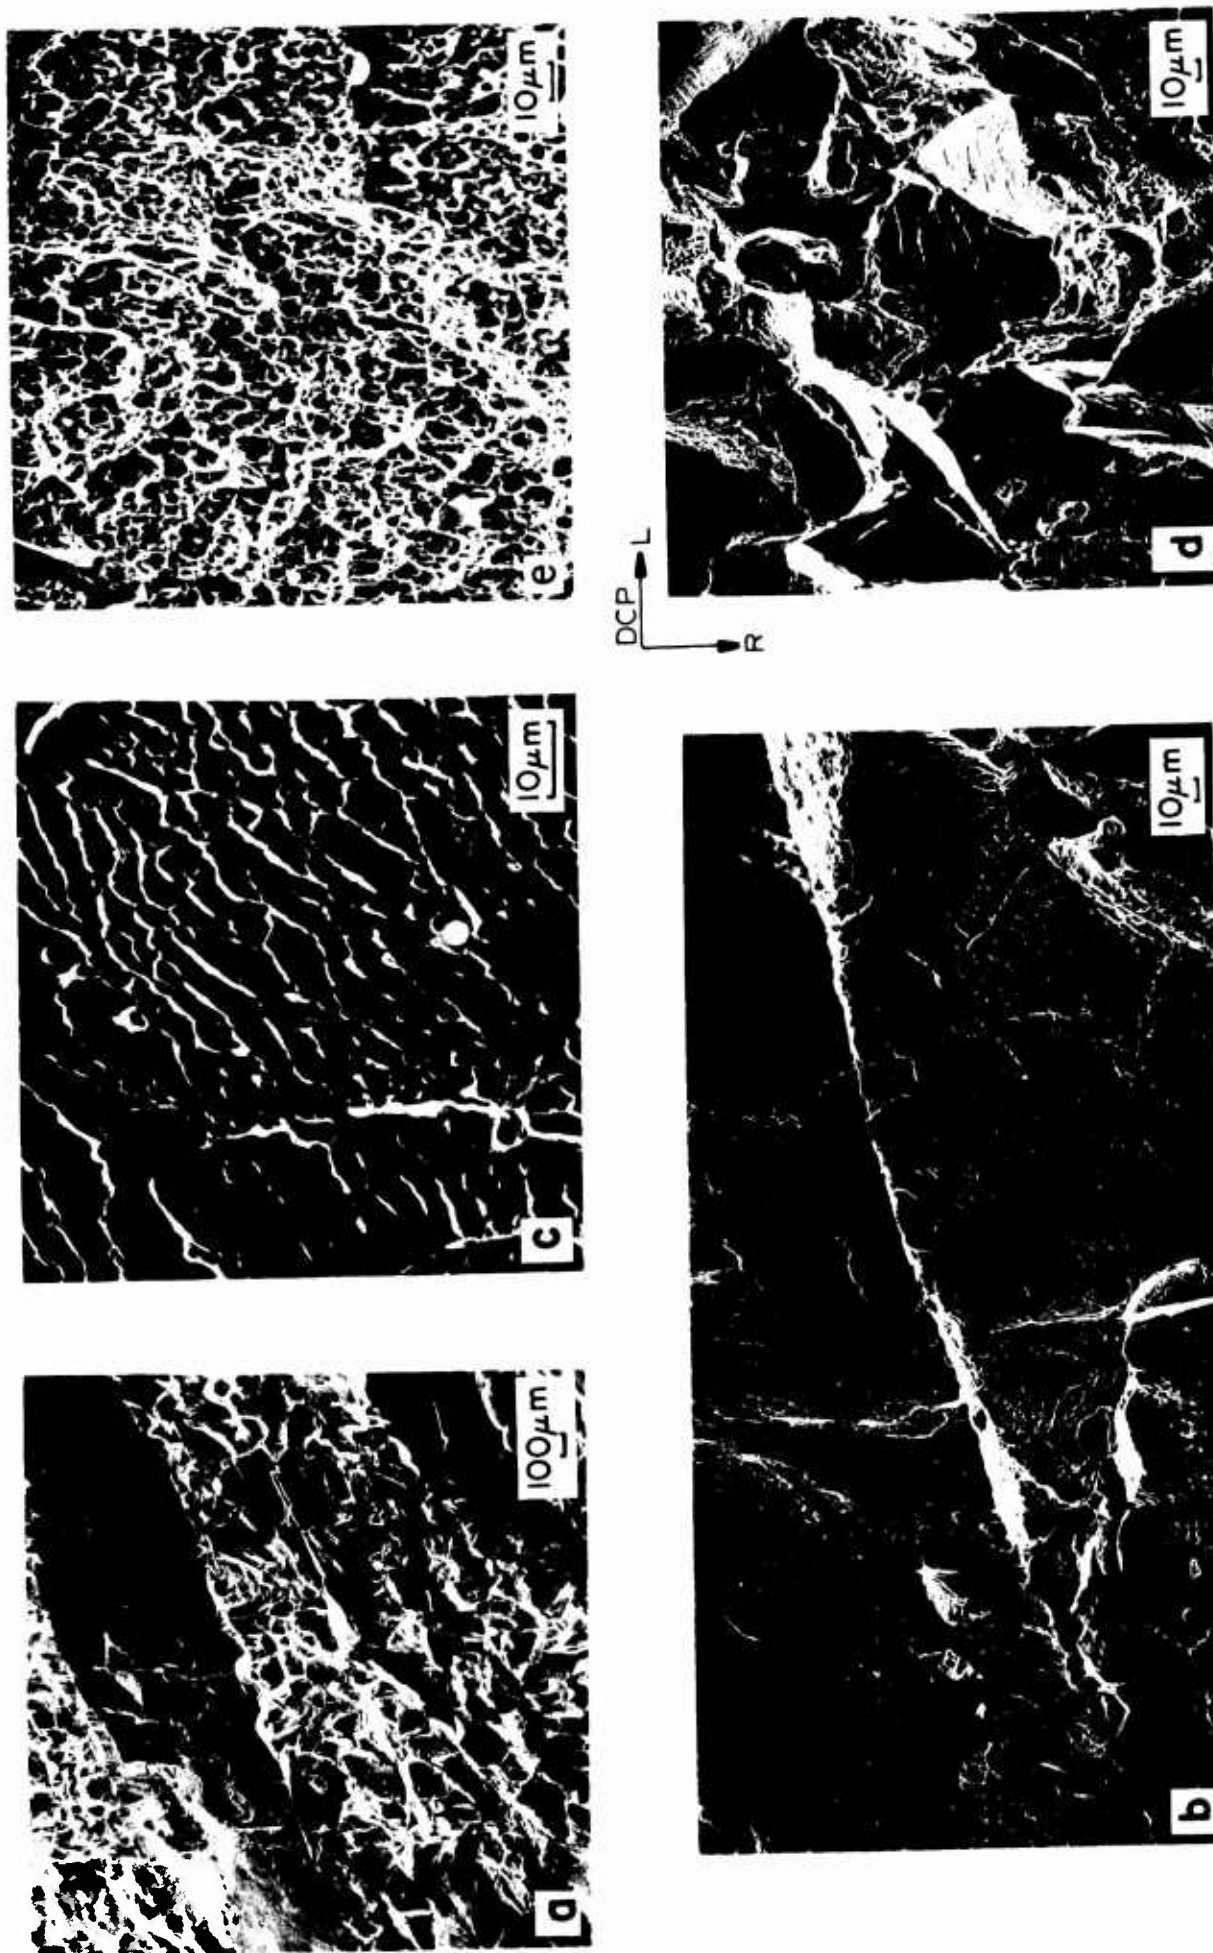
Alloy 334, sample 4MSL8. SEM of fracture surface (a) X30, (b) X300-precrack/fast fracture transition, (c) X1000-fast fracture close to transition, (d) X250, (e) X500-fast fracture
